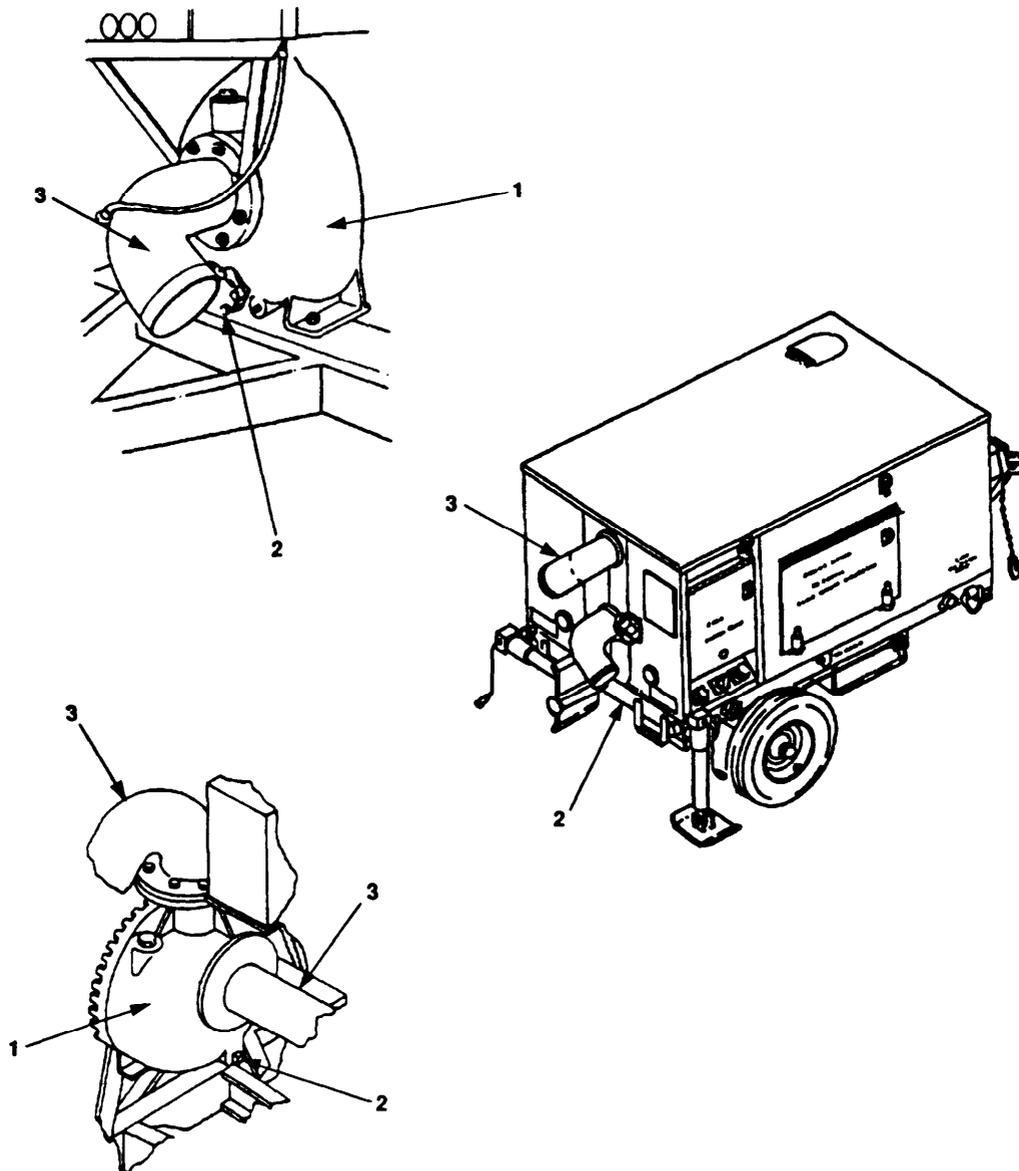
Pumping Assemblies Drain Plug Locations.
